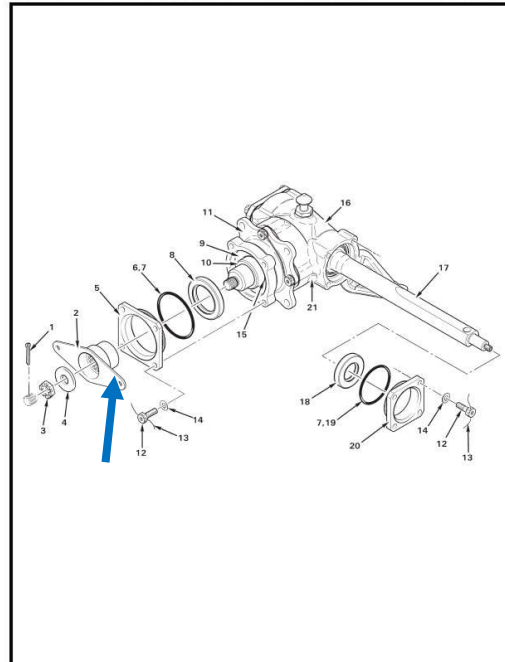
SINGLE-PIECE HUB TAIL ROTOR ASSEMBLY INSTALLATION
